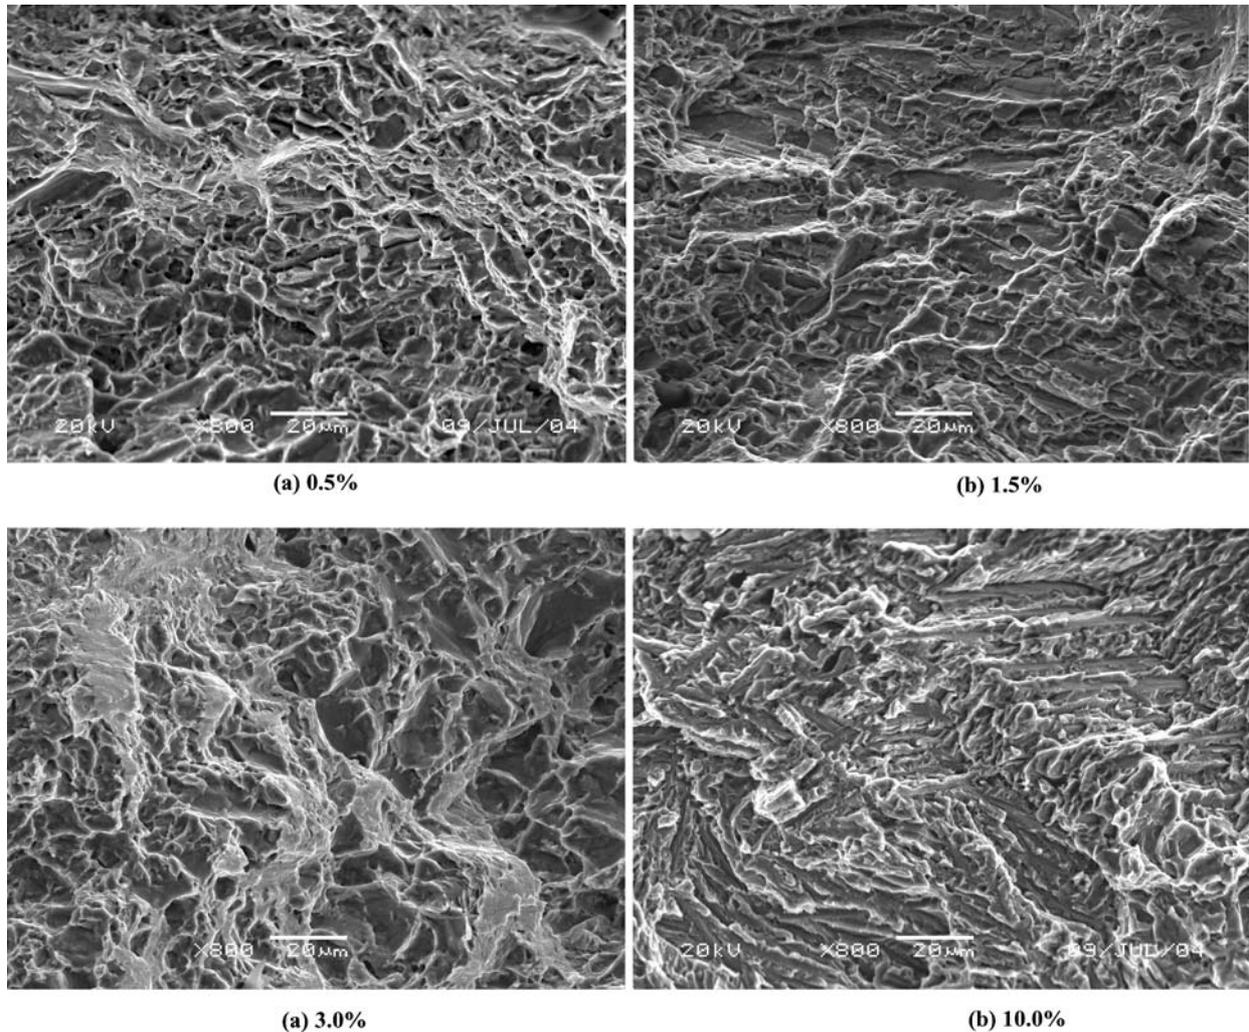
Fracture surfaces of welds made with various oxygen content in argon shielding gas.
